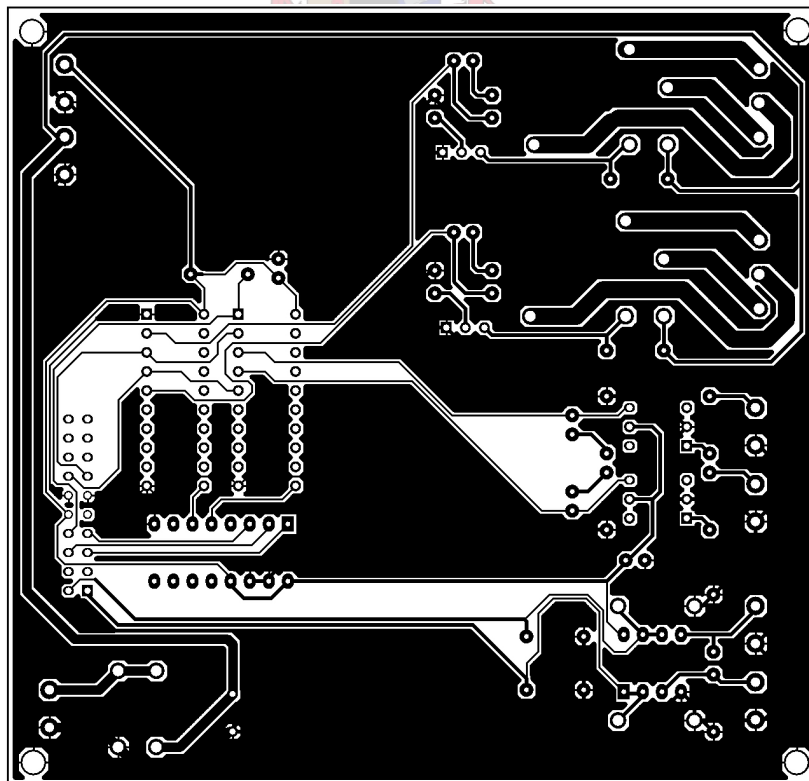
I/O PCB Bottom View, Scale 1:1.
